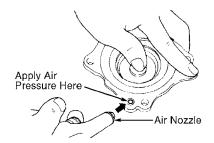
Removing OD Band Servo Piston Courtesy of Nissan Motor Co., U.S.A.
